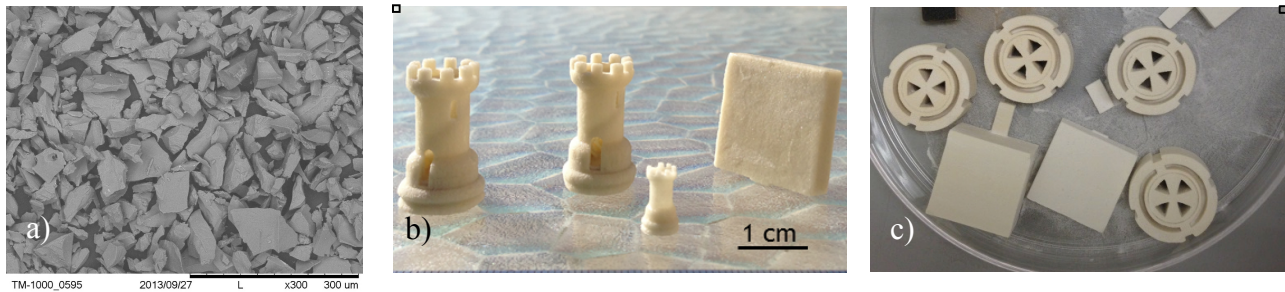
a) alumina powder used for fabrication, b) samples fabricated showing capabilities to produce complex geometries, and c) alumina components for sensor packaging
